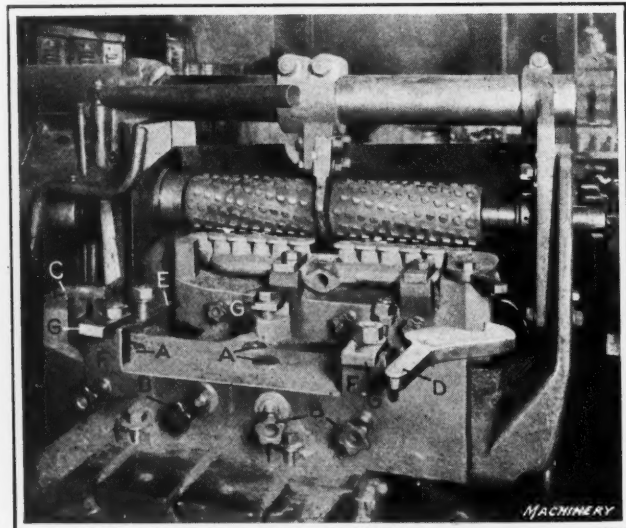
Milling Machine equipped with Two Jigs for milling the Inlet and Exhaust Port Flanges on Manifolds
